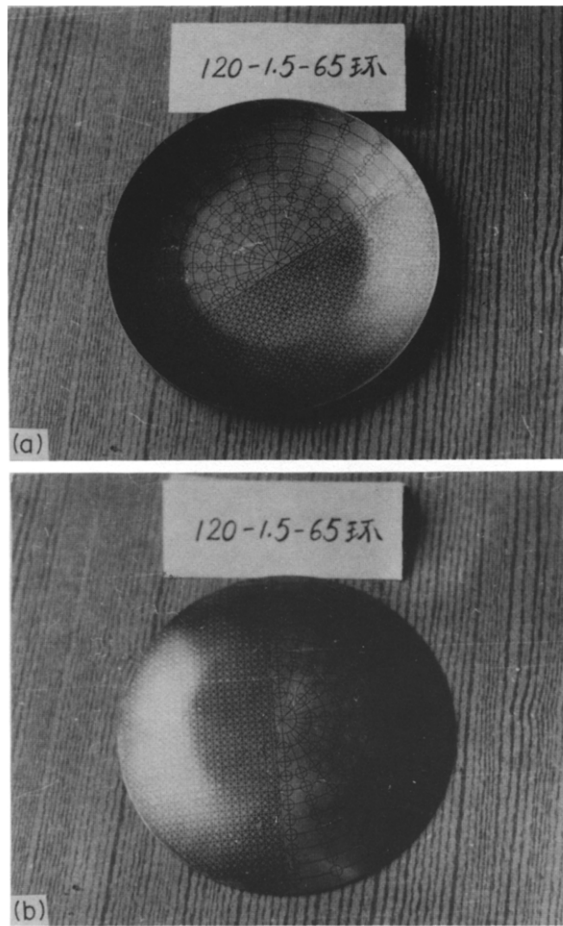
Photographs of a workpiece after unloading: (a) loaded surface; (b) back surface.
